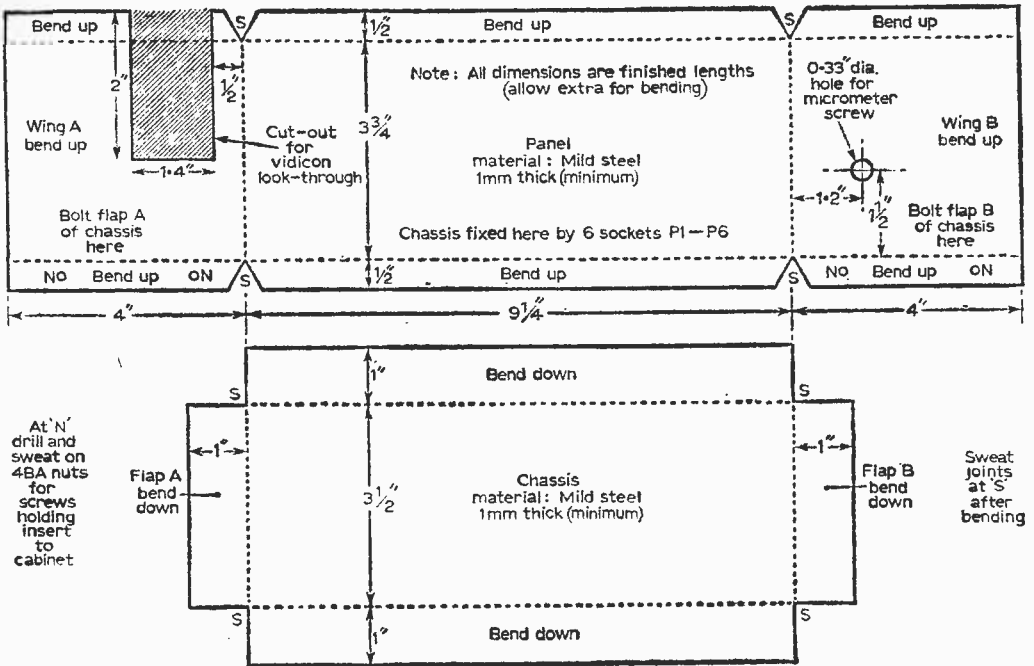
Details of mild steel chassis-and-panel cabinet insert.
